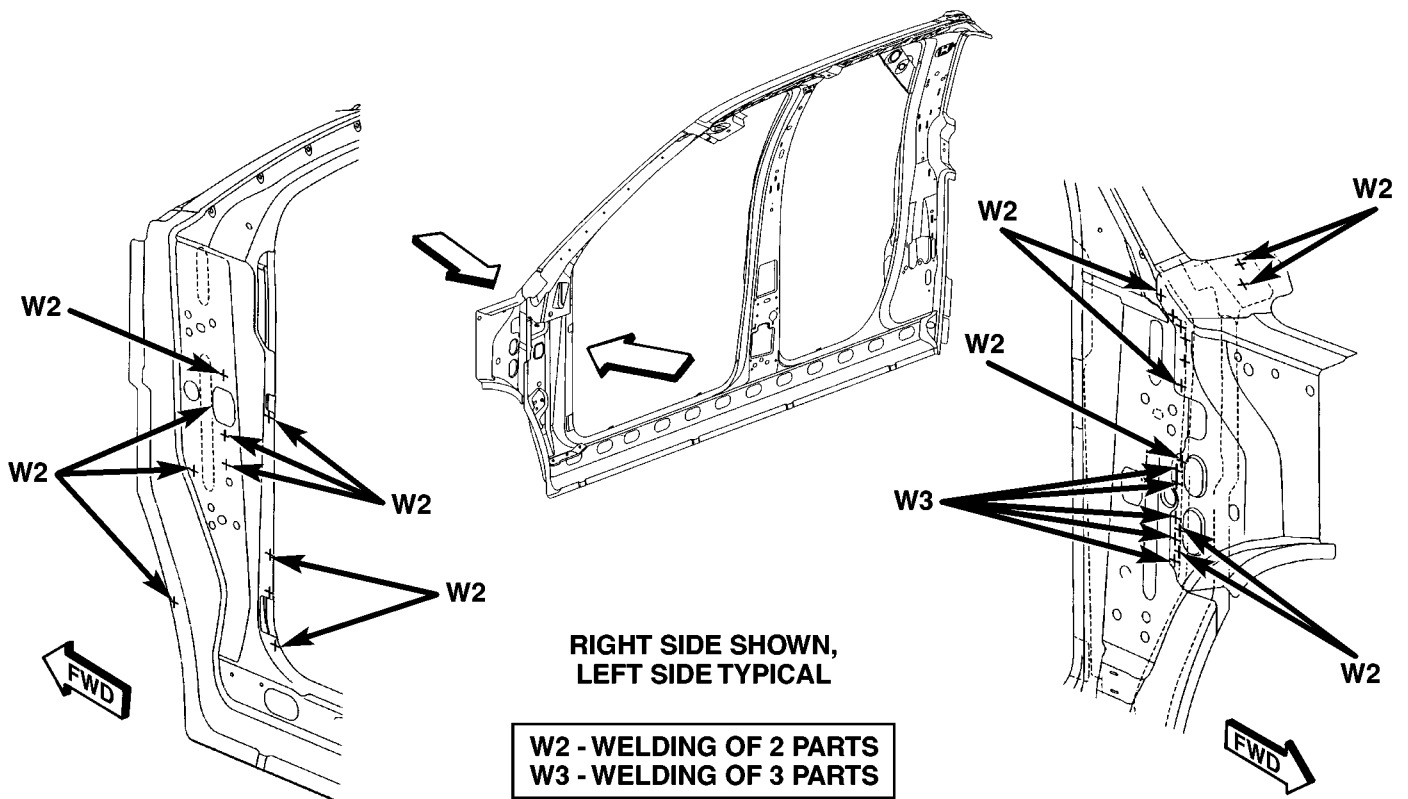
FRONT EXTENSION PLATE - QUAD CAB
